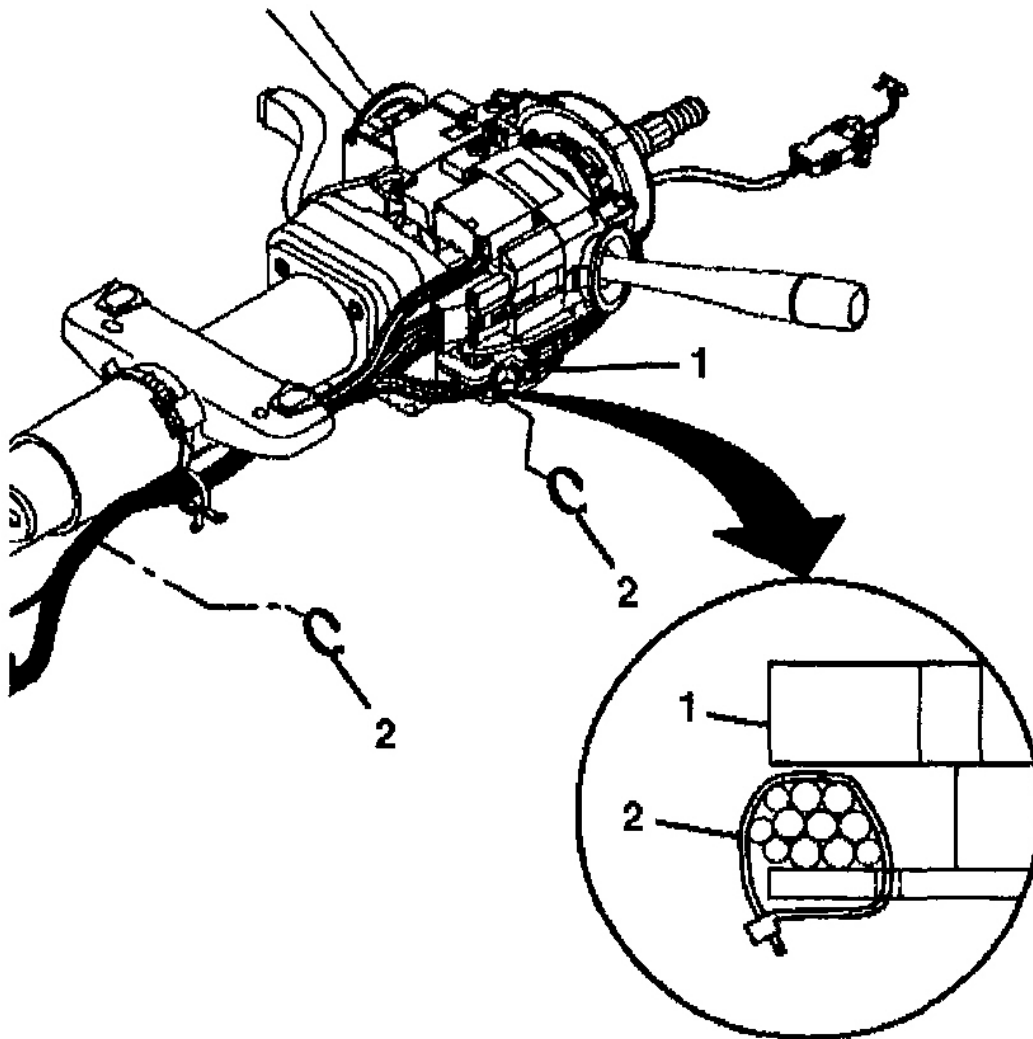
Locating Windshield Wiper & Washer Switch Assembly Clips
